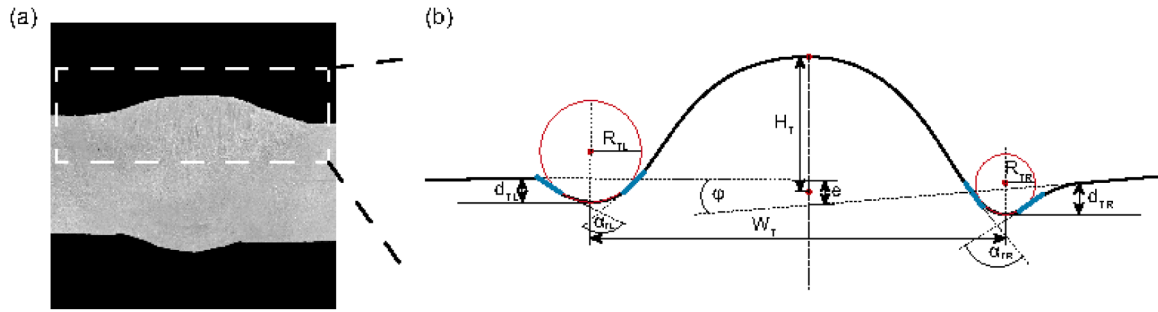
Definition of the weld toe radius and weld toe angle of a butt weld based on [Braun et al. \(2022b\)](#).
